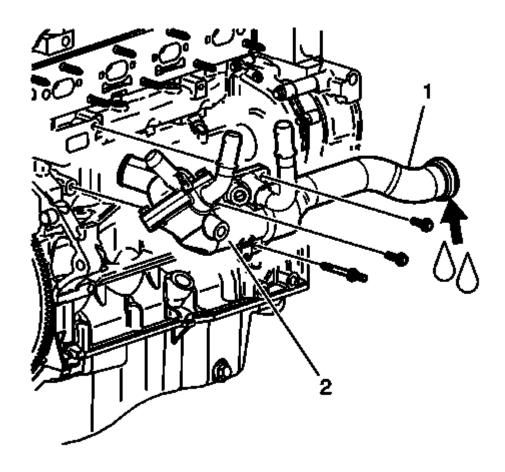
Water Feed Tube And Thermostat Housing Courtesy of GENERAL MOTORS COMPANY
